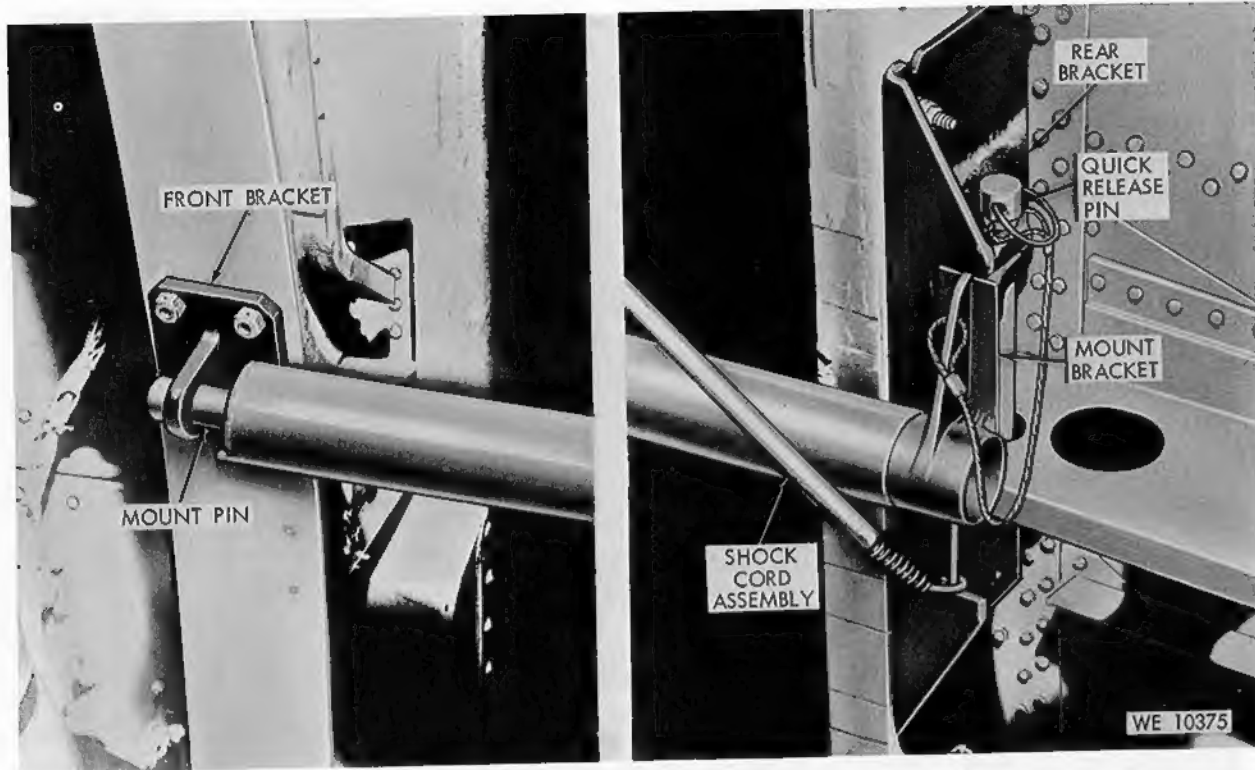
Removal or installation of mount assembly XM24—CH-47A helicopter—left side shown.
